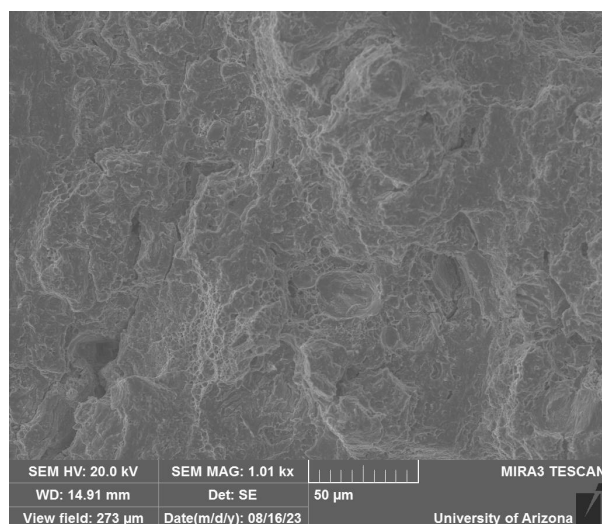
Thermally exposed TE1 fatigue fracture surface SEM 1000×.
